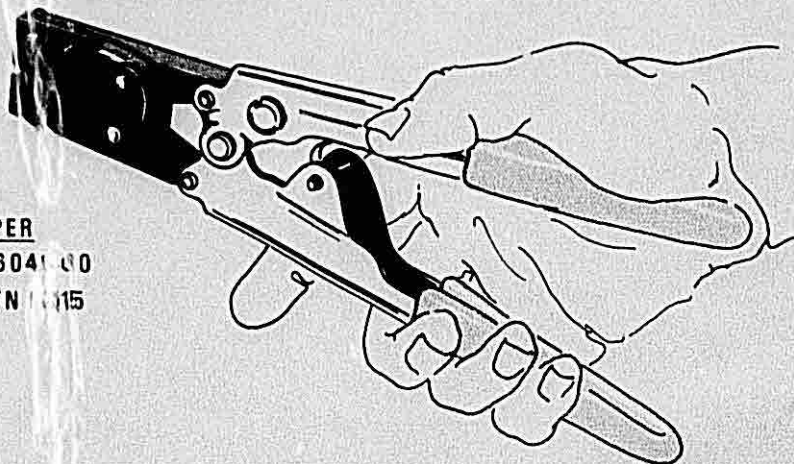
SOLDERLESS TERMINALS AND TOOLS
